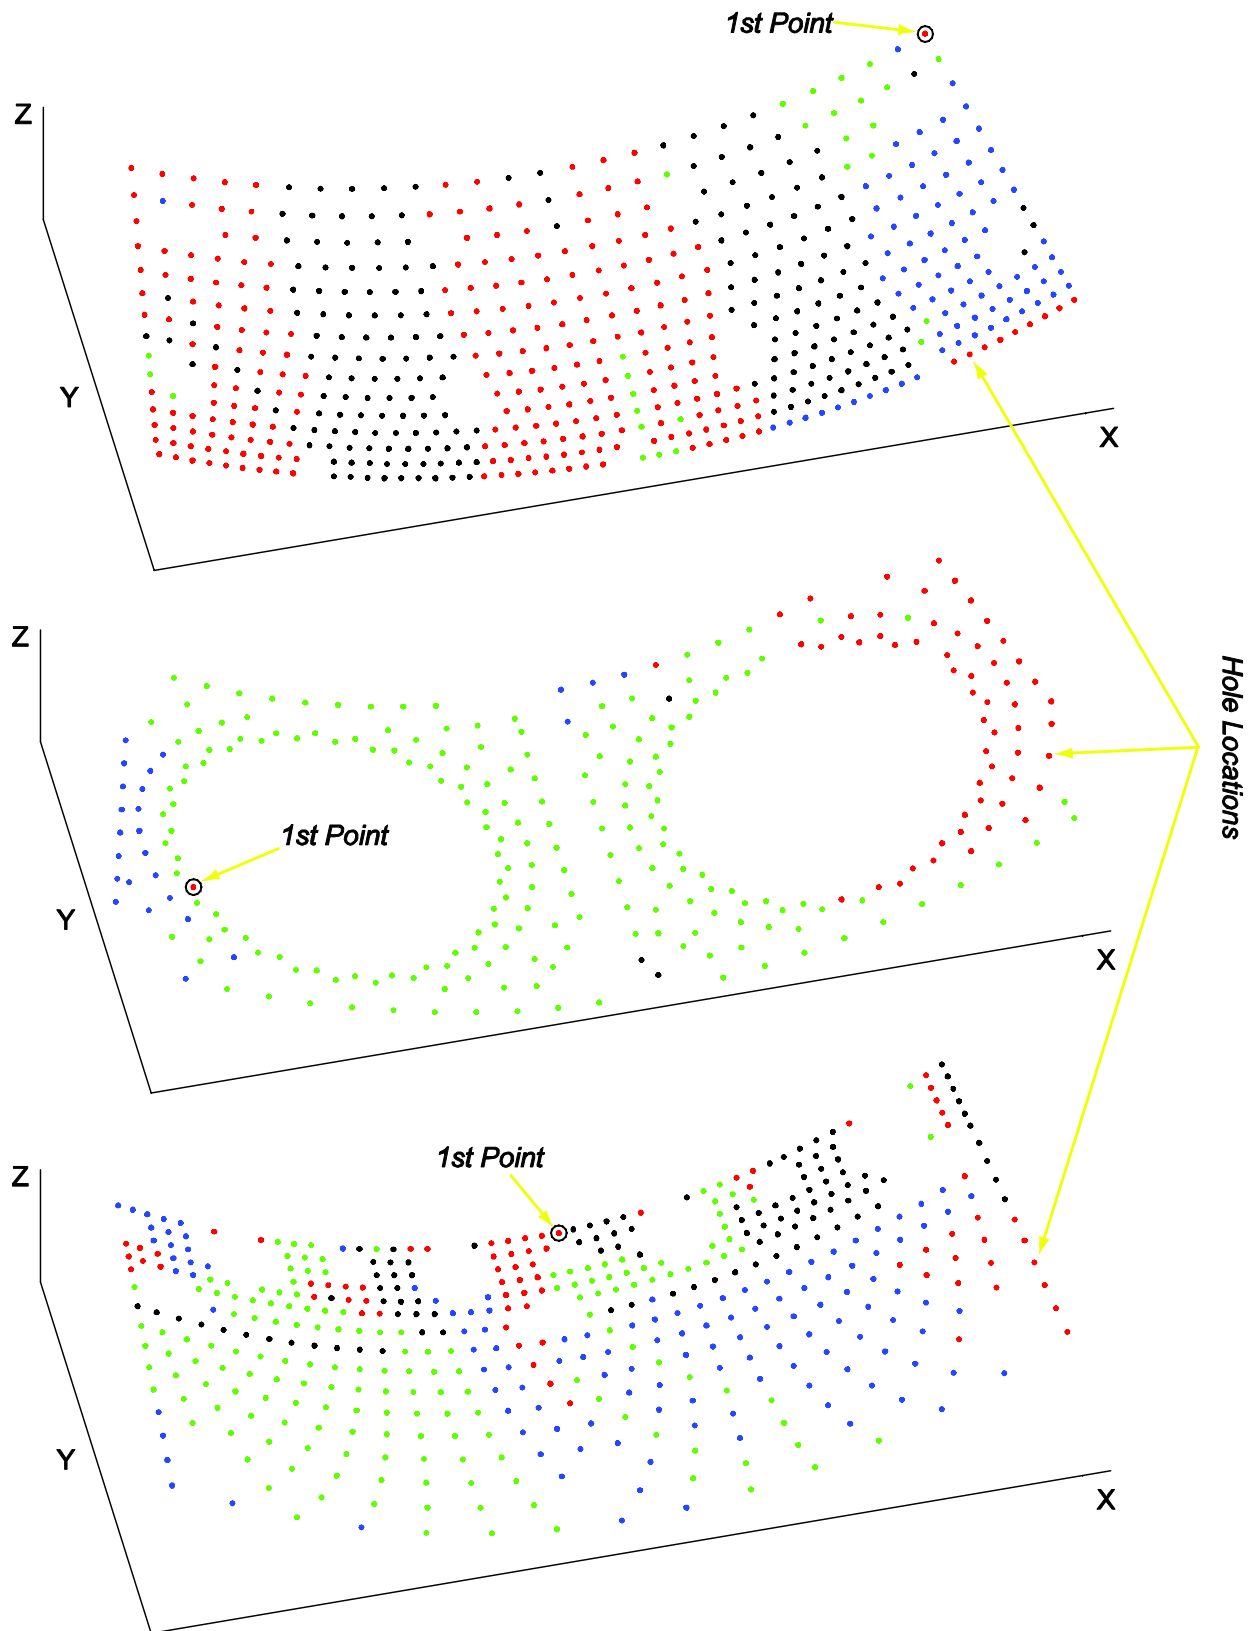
Three Different Examples of Turbine Engine Combustion Chamber Panels to Be Laser Drilled [Examples #1 - #3]
